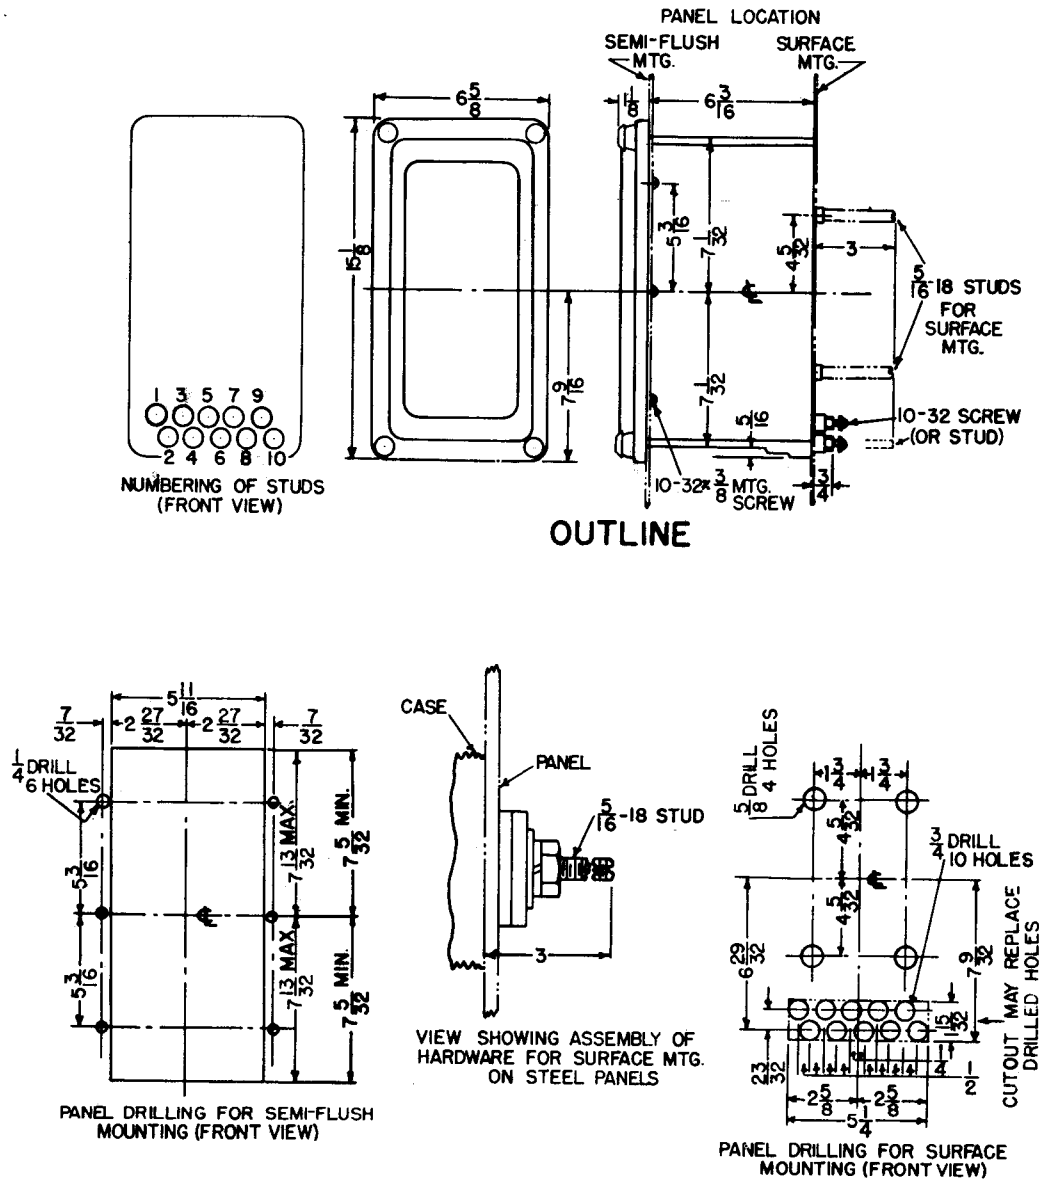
(K-6209273-2) OUTLINE AND PANEL DRILLING DIMENSIONS FOR RELAY TYPE STD
